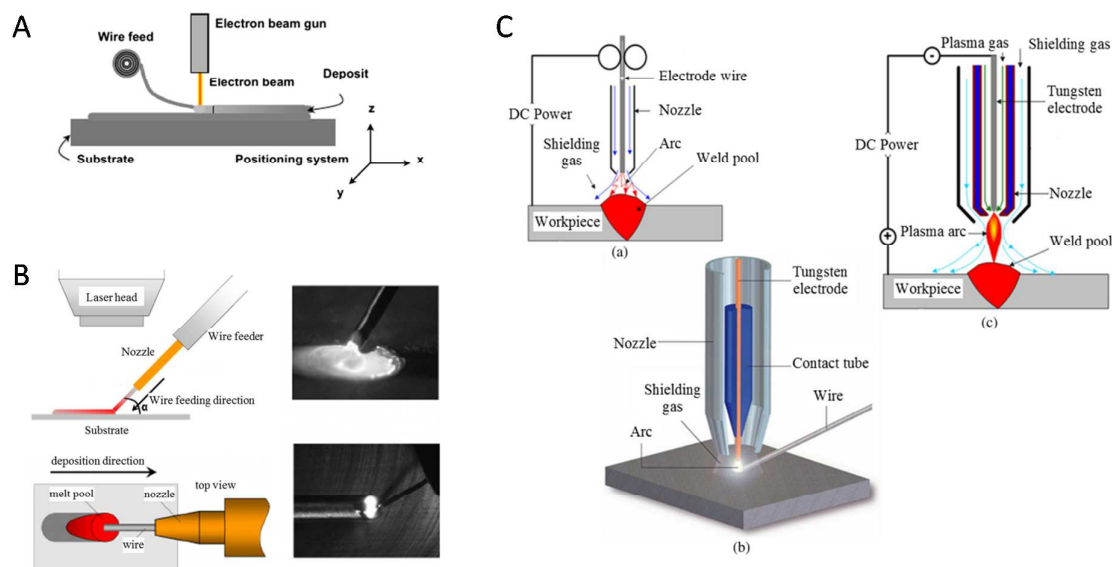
A) Schematic diagram of electron beam freeform fabrication system components. B) Schematic diagram of wire-laser additive manufacturing system. C) Schematic diagram of three possible wire-arc-welding technologies: a) gas metal arc welding (GMAW), b) gas tungsten arc welding (GTAW), and c) plasma arc welding (PAW). Adapted with permission from ref [13]. Copyright (2015) Springer.
